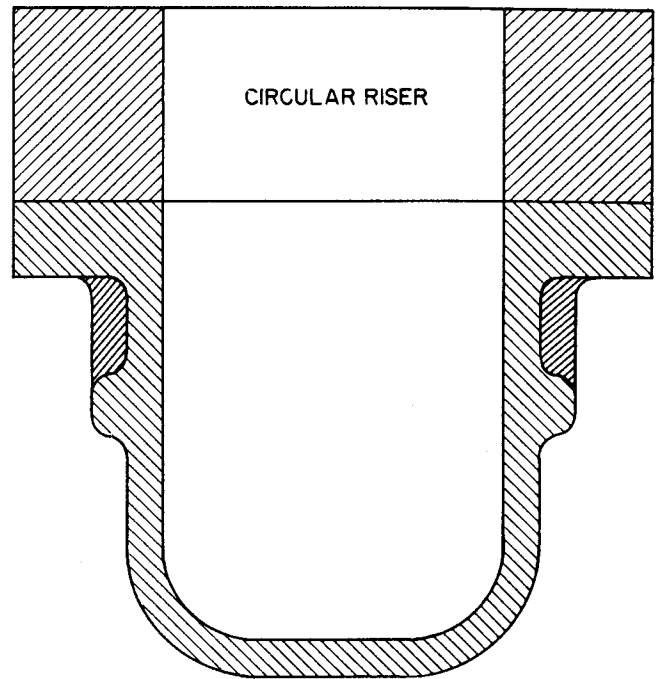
Cross section of pressure vessel design showing added padding to feed an isolated heavy section (2).
